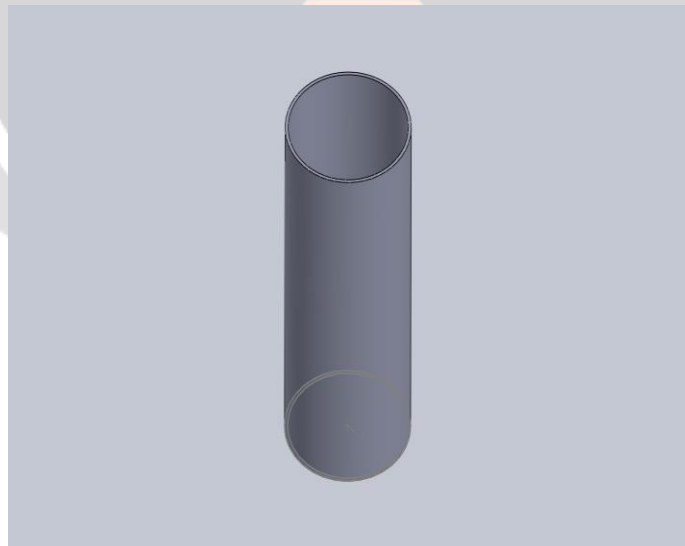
model of journal bearing for constant l/d 2.4 and eccentricity 0.2
